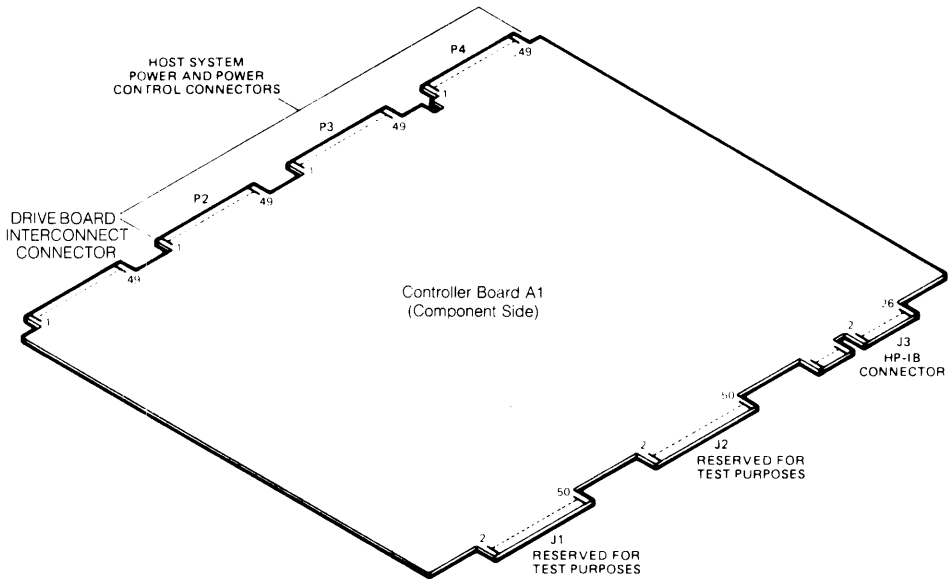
Controller Board A1 (07902-66501) Connectors
